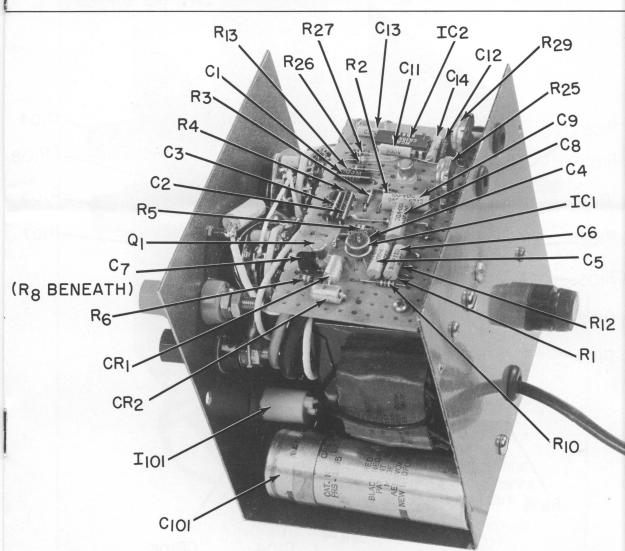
High-level view of right side of calibrator showing layout of the generator-amplifier board. Note that the DC and AC calibration controls are mounted so adjustments can be made by a screwdriver through the grommets on the rear of the chassis. The MOS field-effect transistor, located near these controls, is mounted in a socket. A builder who chooses to wire the MOSFET directly must take the precaution of keeping all leads shorted together until the circuit wiring is complete.
